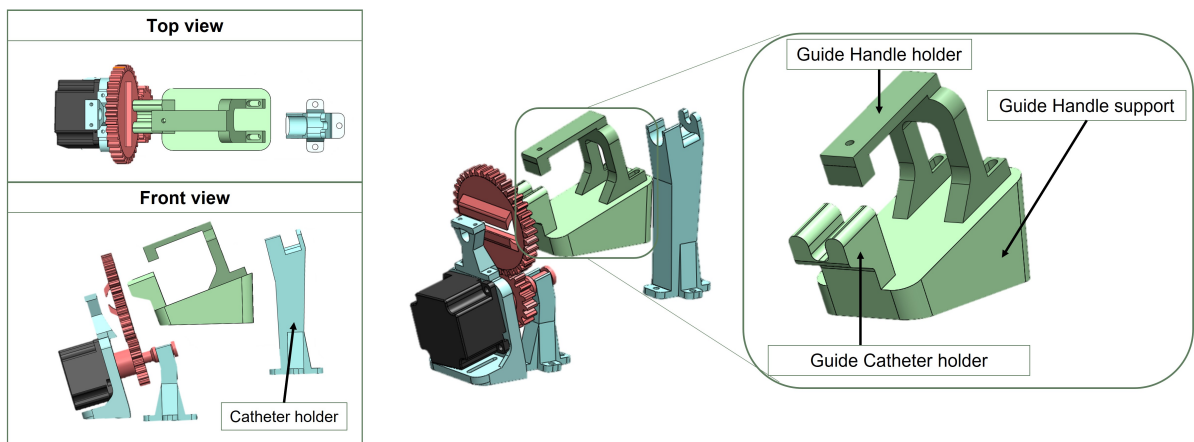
Complete Steerable Guide Catheter actuation system. On the left: top and front views of the actuation and support system comprising motor housing, spur gears, Guide Handle and catheter holder. On the right: particulars of the Guide Handle support.
